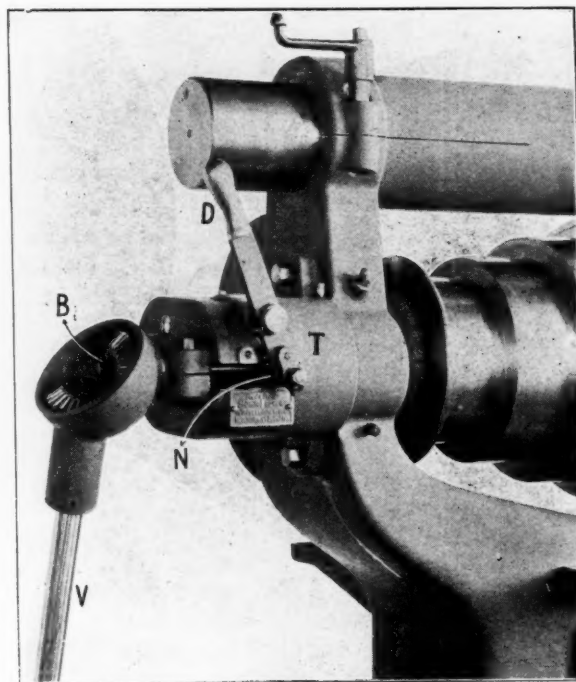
FRONT VIEW OF UPPER GEAR BOX.
